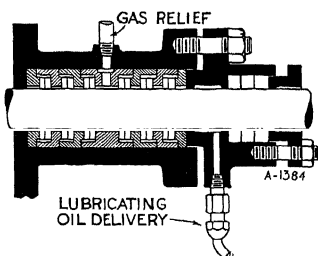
Oil loss to suction is minimized by separating gas relief and oil lantern. (Courtesy Socony-Vacuum Oil Co.)
